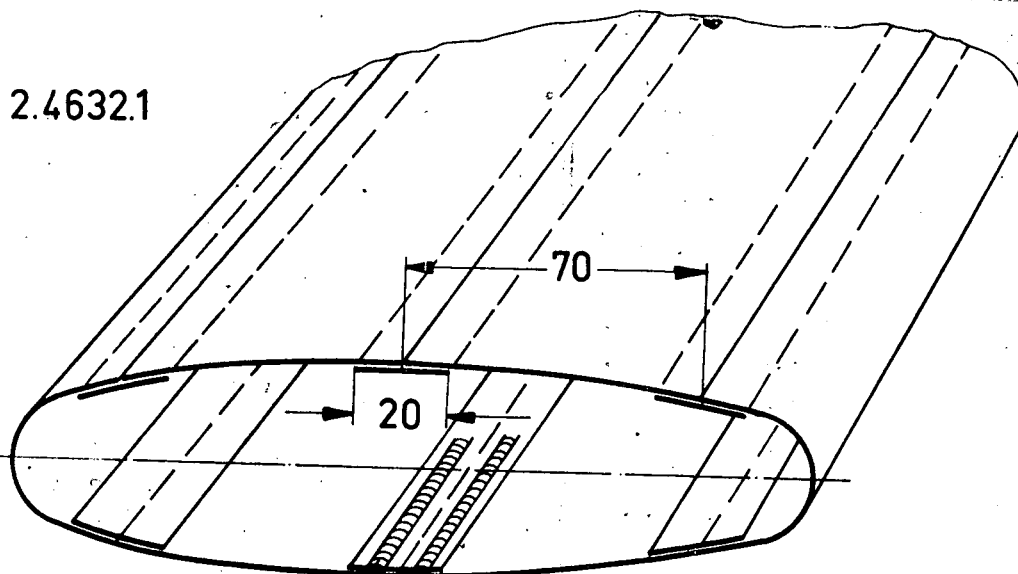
Construction of Gas Conduit (Rolled Seam Welding).
